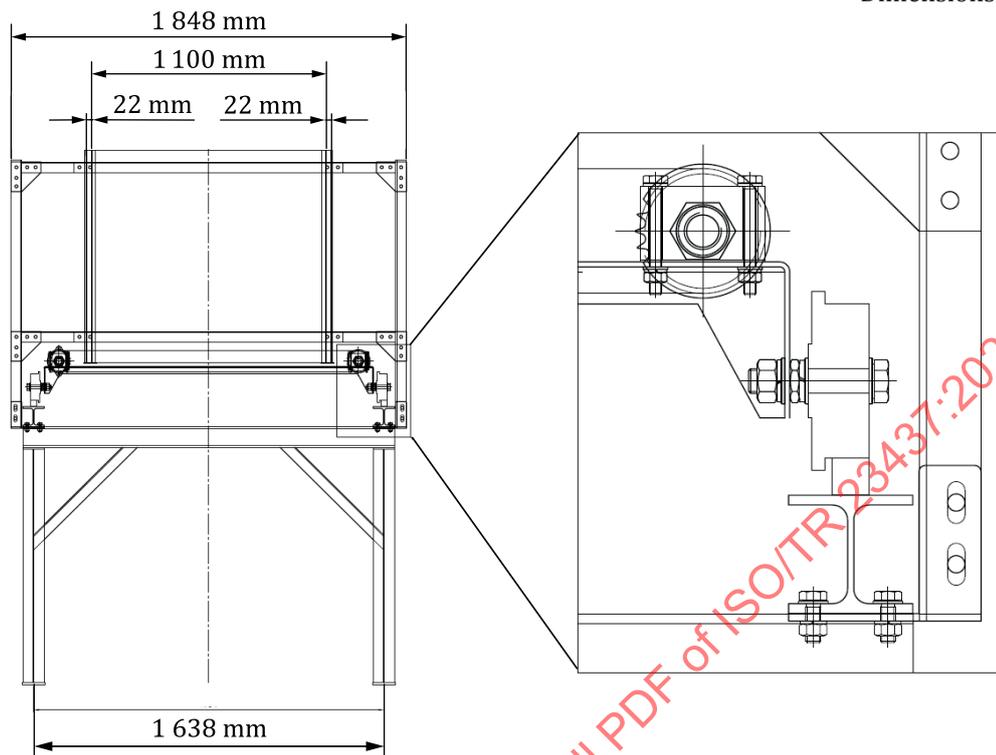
Side-view (left) with a detailed view on the undercarriage of moving floor (right)
